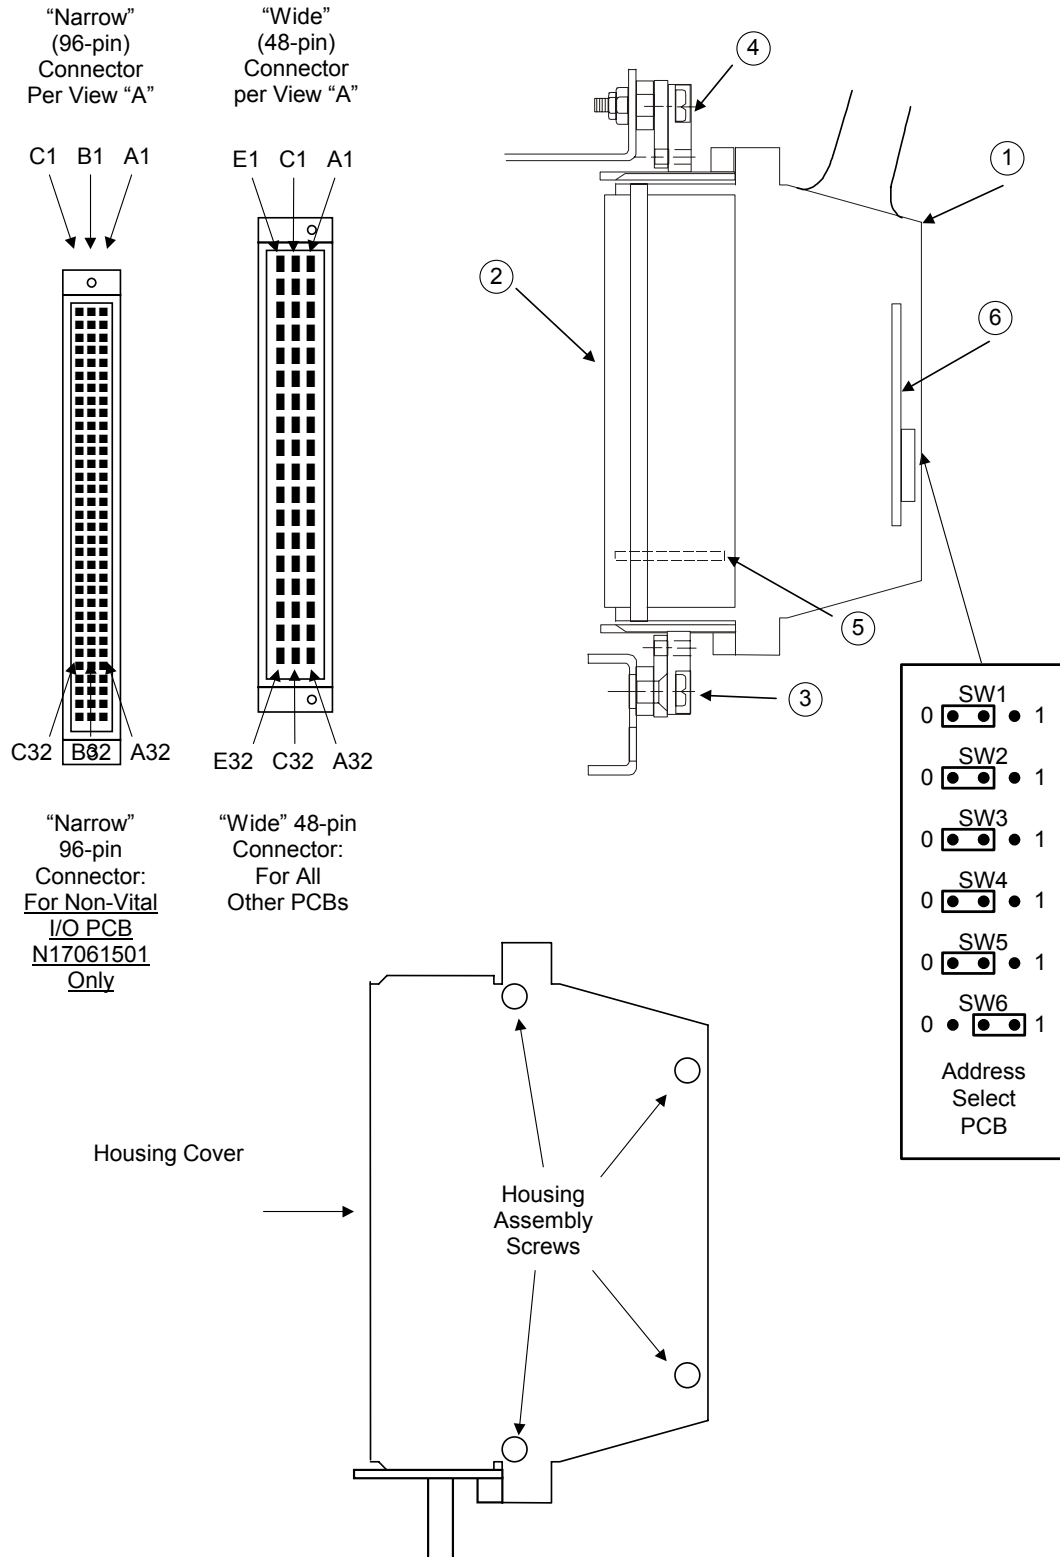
PCB Wiring Connector Mounting and Integral Address Switch Board
